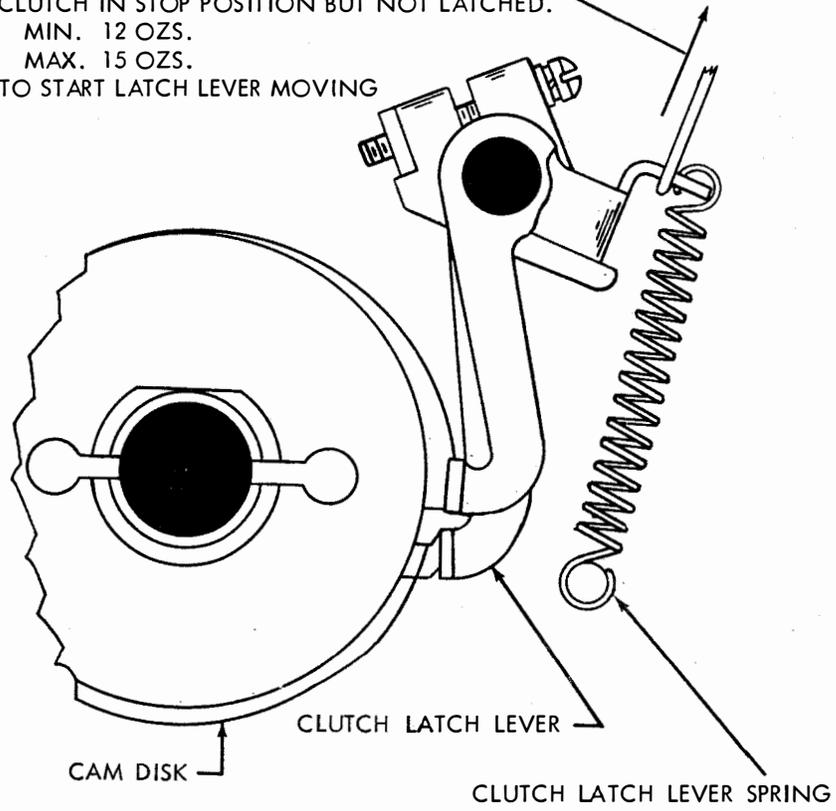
CLUTCH LATCH LEVER SPRING
